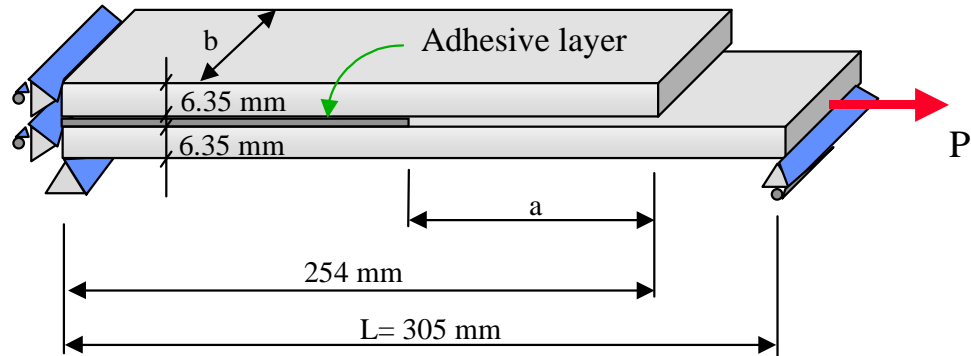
Crack Lap Shear (CLS) Specimen.
